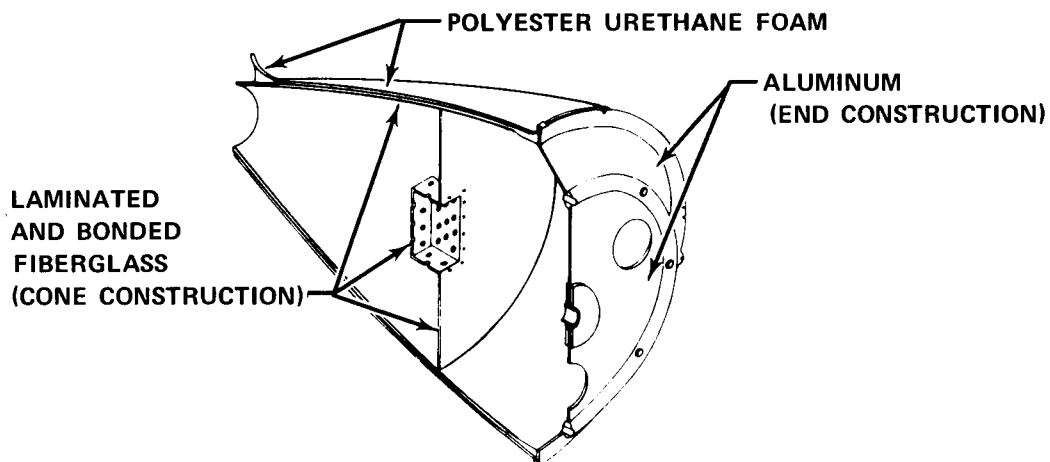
Cutaway of Handling and Shipping Plug FD 66805
